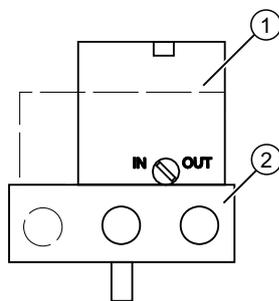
Purge air switch on the pneumatic block; view of the positioner on the pneumatic connection side when the cover is open
